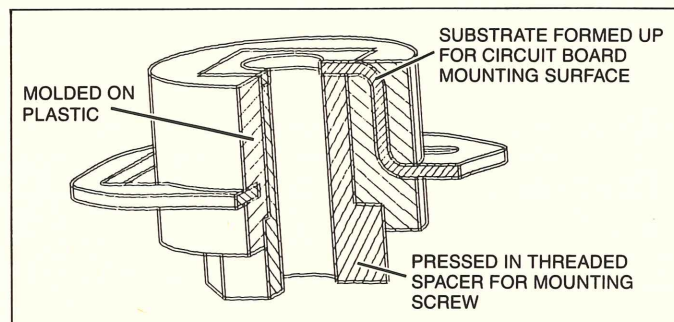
Detail used for mounting circuit boards where a chassis ground is necessary.
